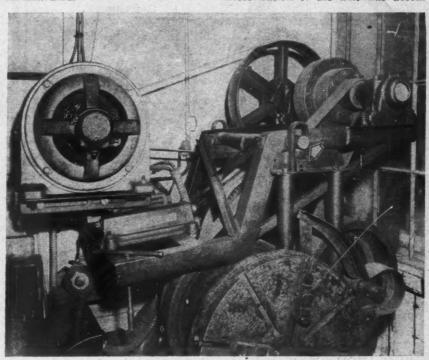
Heavy duty floating drive for 42-in. lathe. Complete assembly pivots on shaft (arrow) providing belt tension between jack shaft and lathe.
